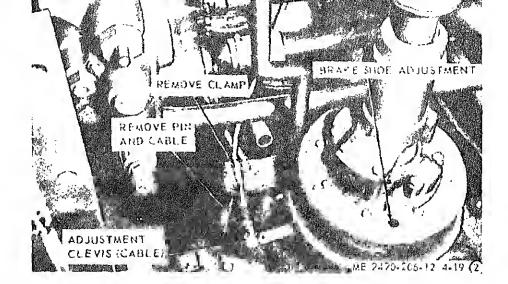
Parking brake hand lever and cable, removal and installation (sheet 2 of 2).
